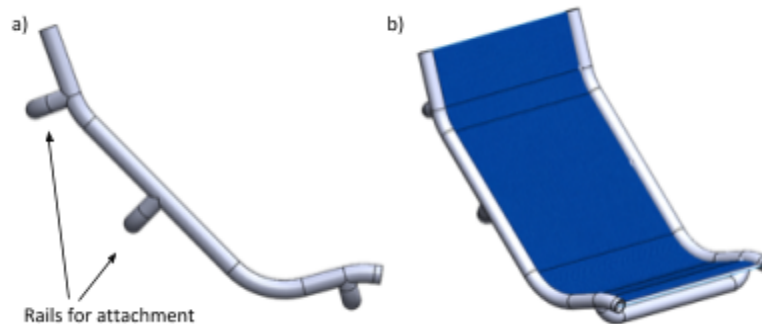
Initial seat design. This would attach to the central pipe of the frame. View (a) shows a profile view of the seat with attachment rails; view (b) shows an isometric view of the seat.
